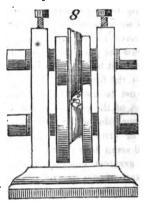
, which rollers press the cheeks OP close upon the mandrel, I; and when the chair leaves these rollers it is complete; and shown at fig. 2; these shears may be worked if the mandrel be withdrawn, and the rail now inserted in it, will have the appearance shown at fig. 9, being the recess or aperture
